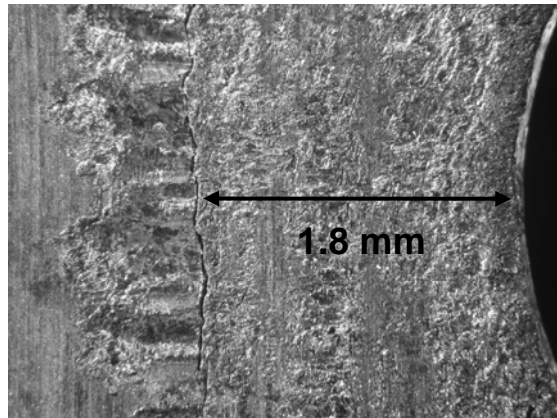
Fretting fatigue crack appeared on contact surface of bolted specimen after fatigue testing.
